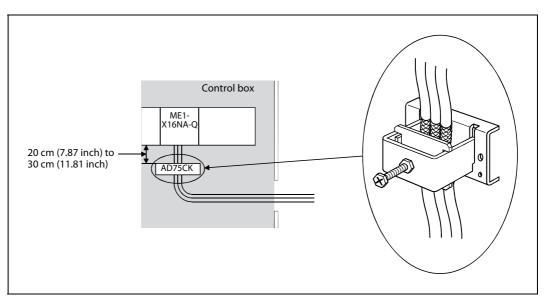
Grounding of a shielded cable using a AD75CK cable clamp
